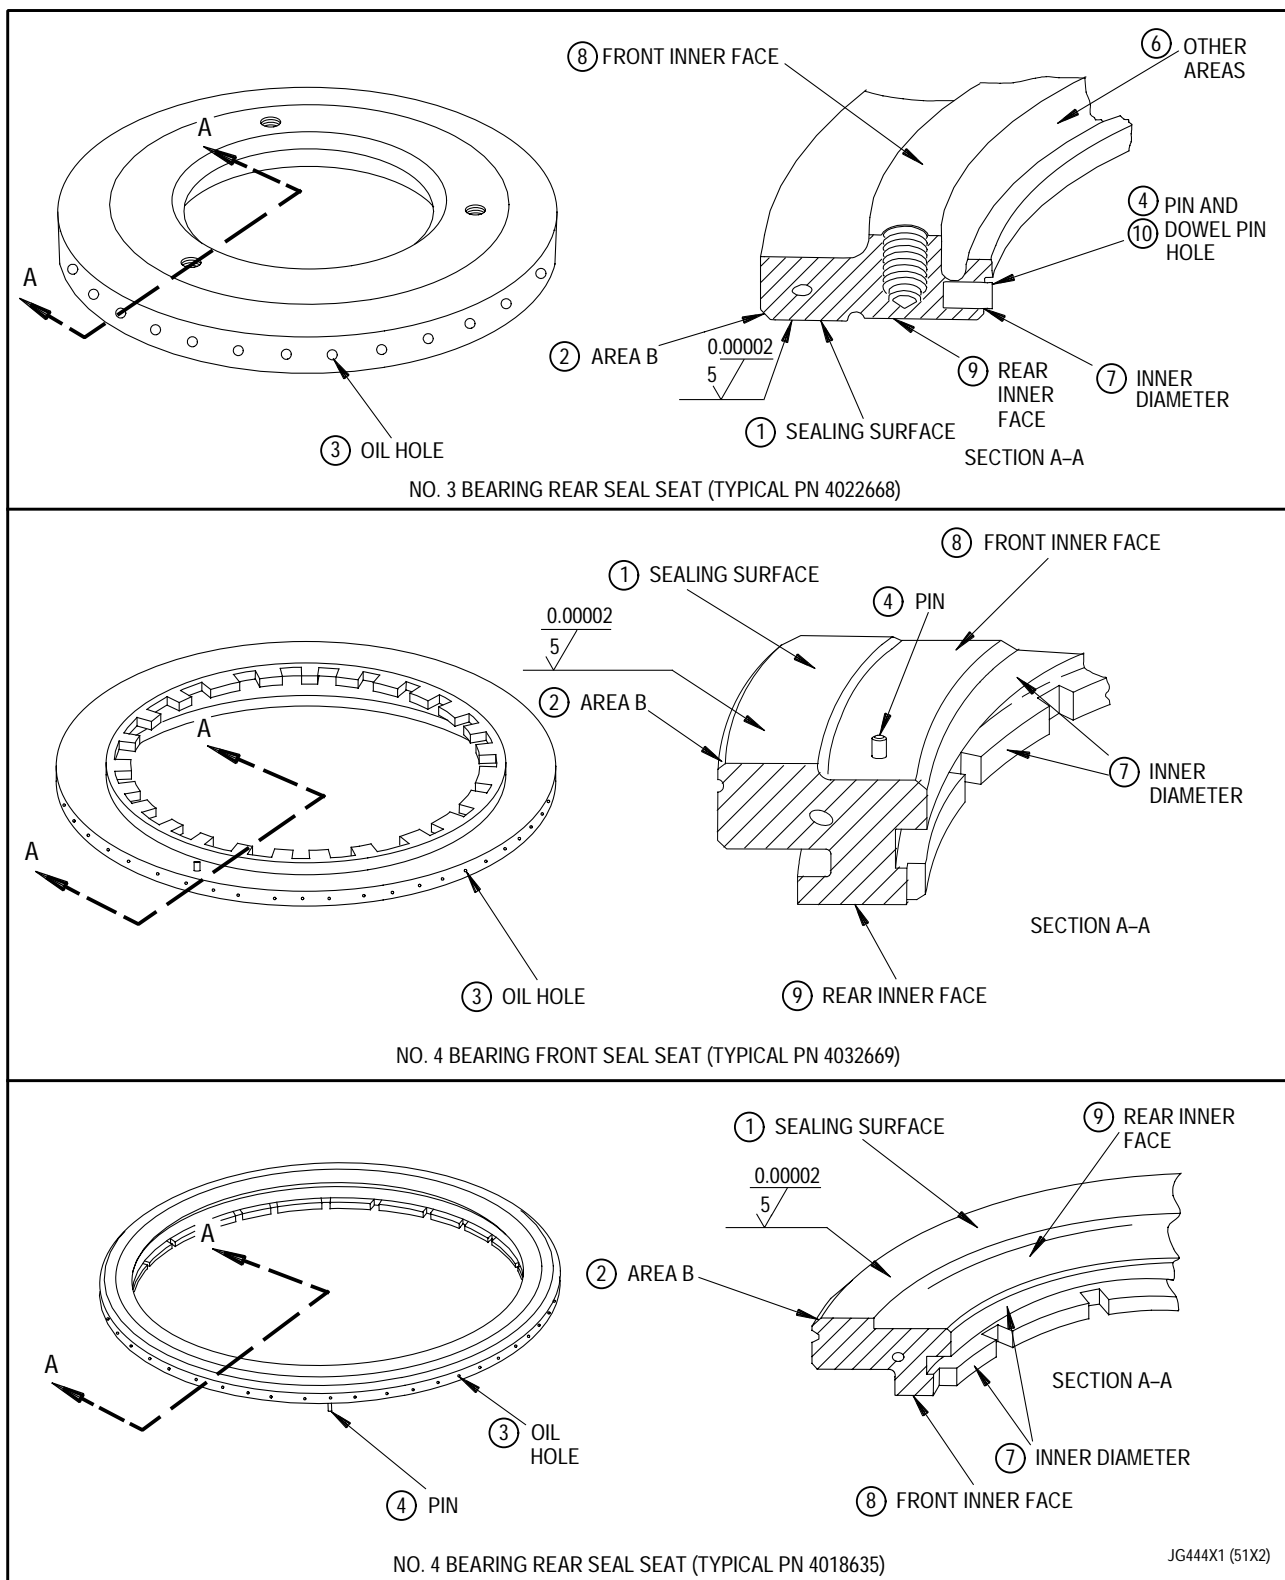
No. 2, 3, and 4 Bearing Seal Seats - Inspection (Sheet 2 of 2)
